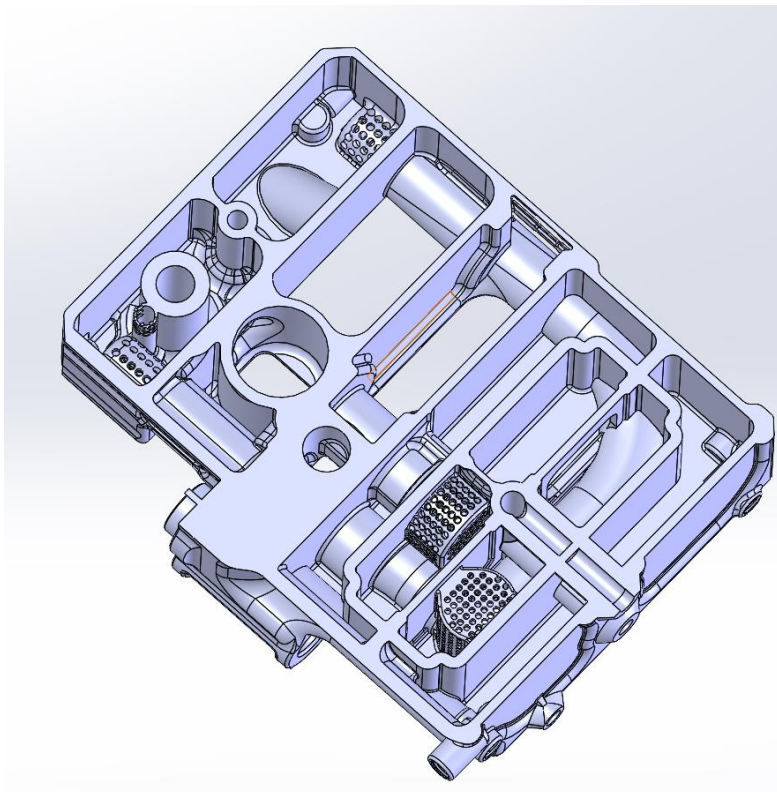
Horizontal cross-section of the CAD view of the Fluid Matter Exchanger showing the large amount of hidden internal features, including multiple hollow chamfers, filters, and channels.
